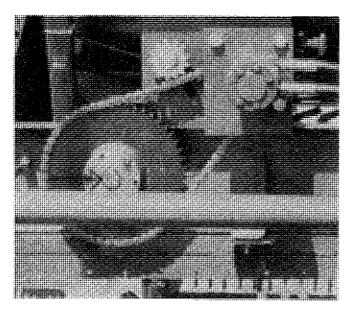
TANK CONVEYOR DRIVE (Shield removed for clarity)
